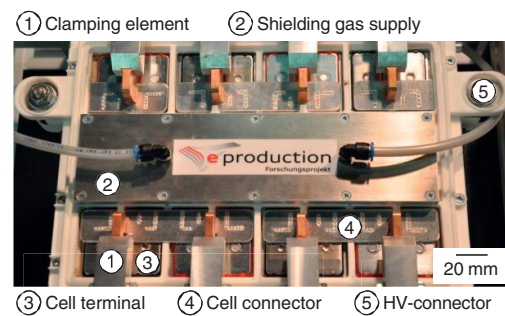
Welded battery pack with eight Li-Ion-cells; welding parameters: laser power $P_L = 2700$ W, welding velocity $v_w = 33,3$ mm/s, beam oscillation amplitude $A_{osc} = 0,25$ and beam oscillation frequency $f = 200$ Hz
